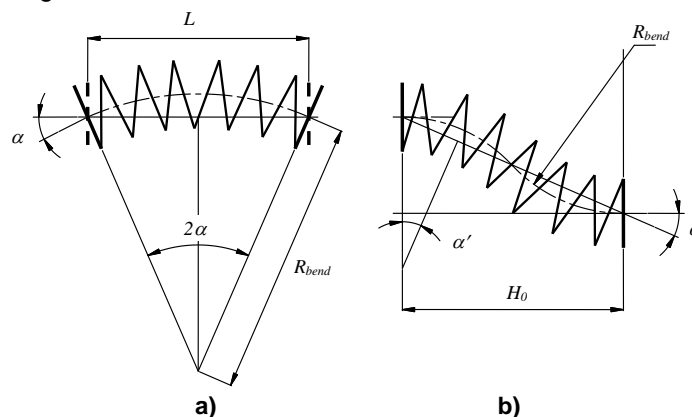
Calculation scheme for finding the radius of bending for the elevator flexible screw member:
